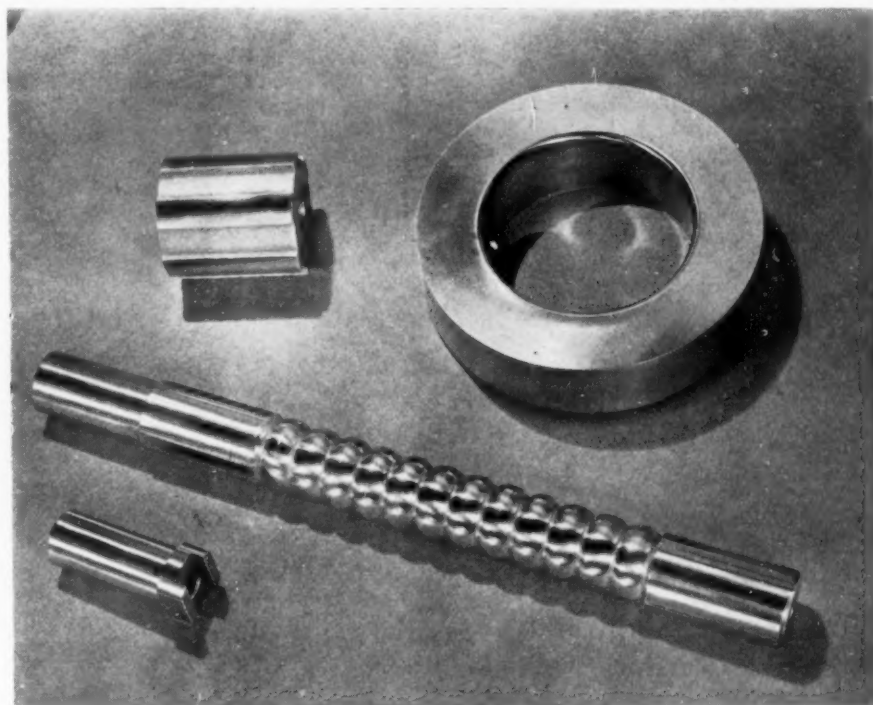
Chromium plated drawing dies with 0.0015" on a side. Burnishing broach and the quenching plug are also chromium plated.
